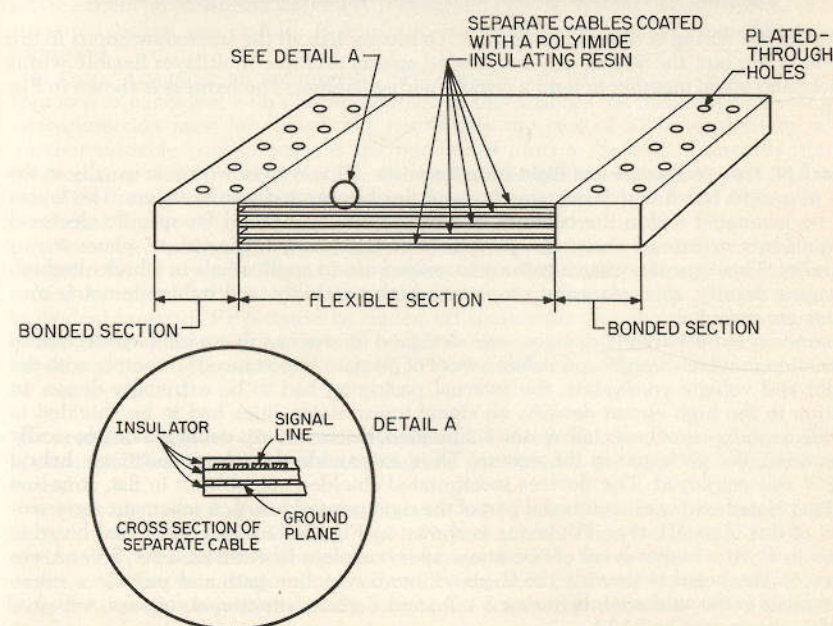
Multilayer flexible printed wiring, class III, type I.
